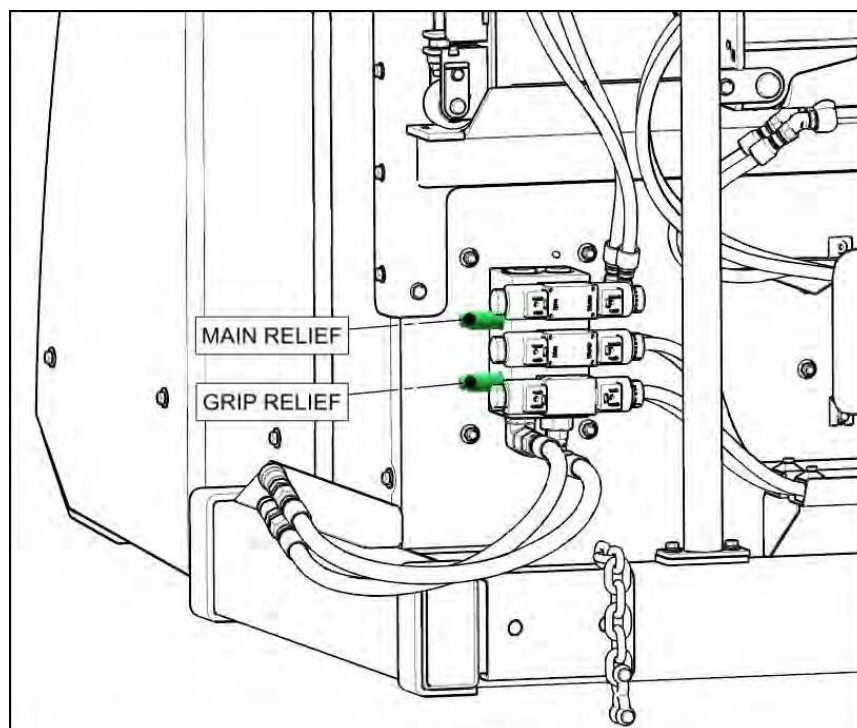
Electric Solenoids Mounted to Directional Valve
